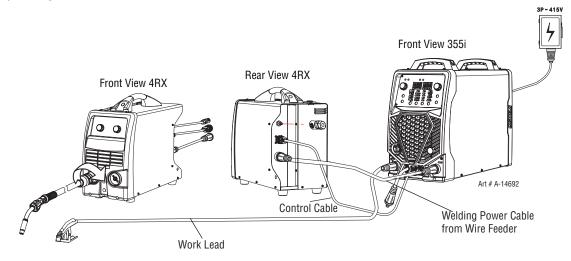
Setup for 4RX Wirefeeder with Gasless MIG Wire
